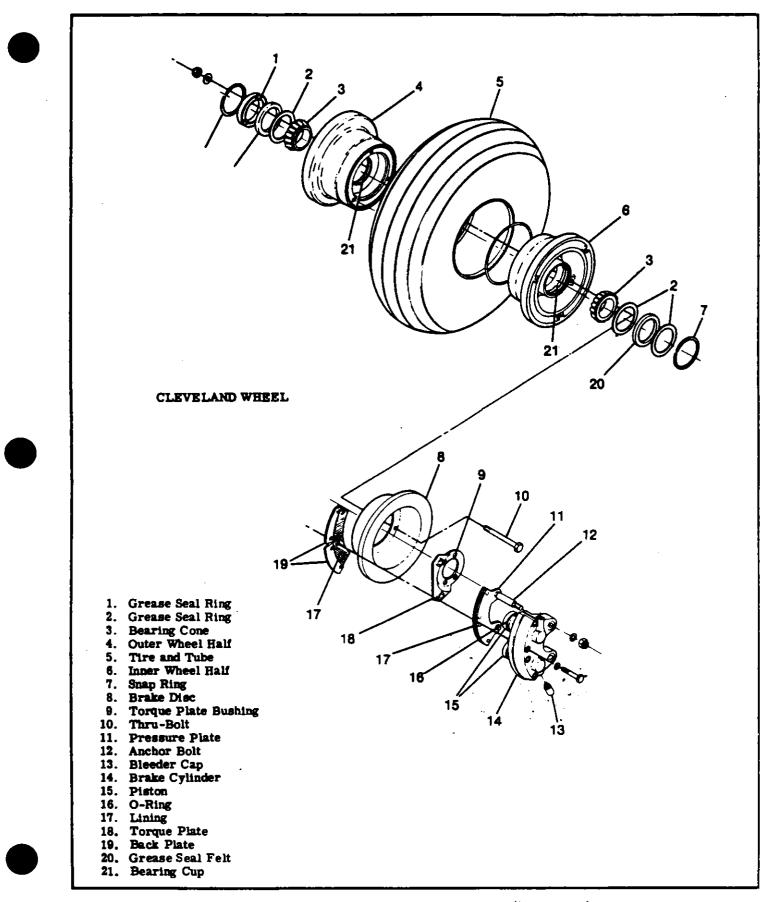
Main Wheel and Tire Assembly (Sheet 1 of 2)
